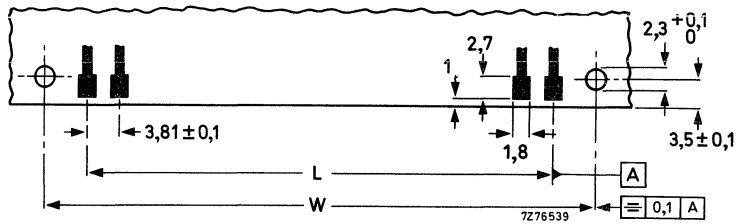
Recommended dimensions of the printed-wiring board to be fitted to the female part; see Table 5 for dimensions L and W.
